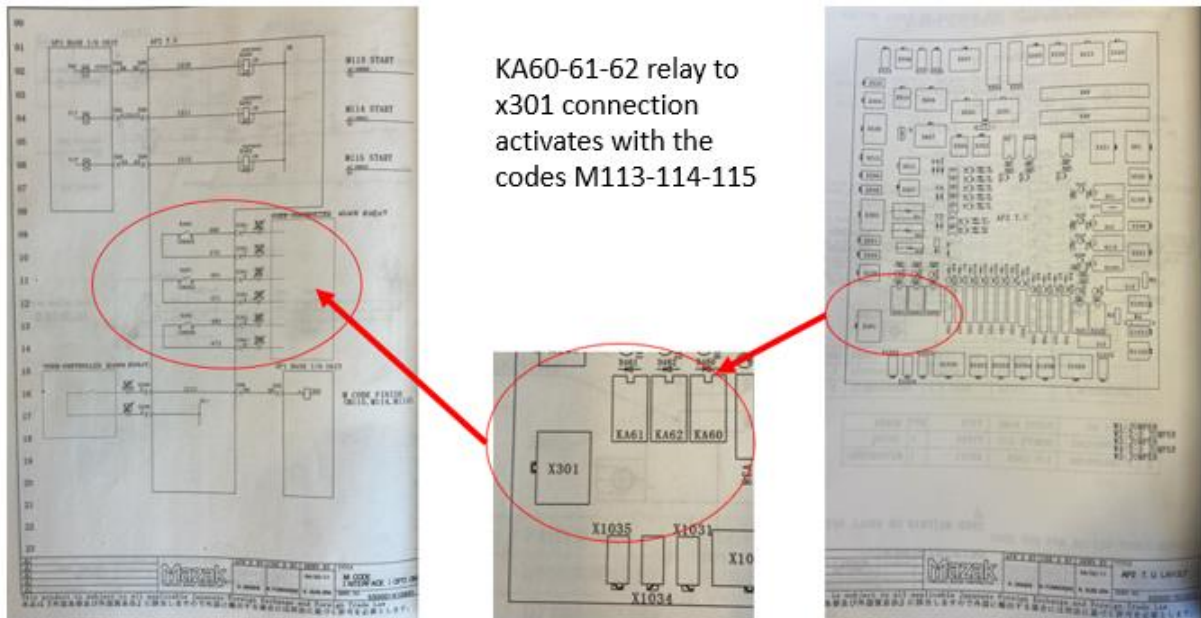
Picture from user's manual for Mazak CNC-center with the M-codes used to activate the Welding machine.
